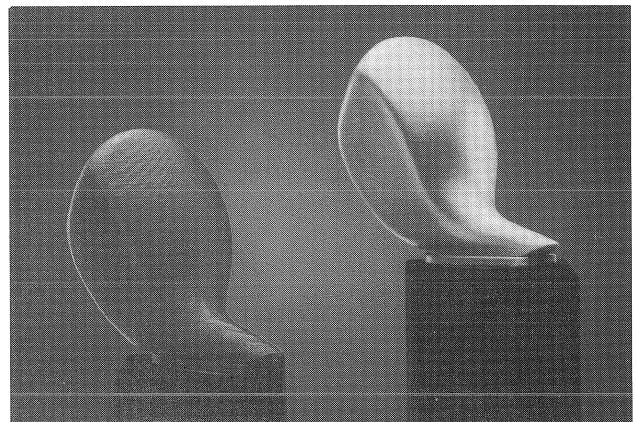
Fused Deposition Modeling : golf club driver in investment casting wax (left) and machinable wax (right).
